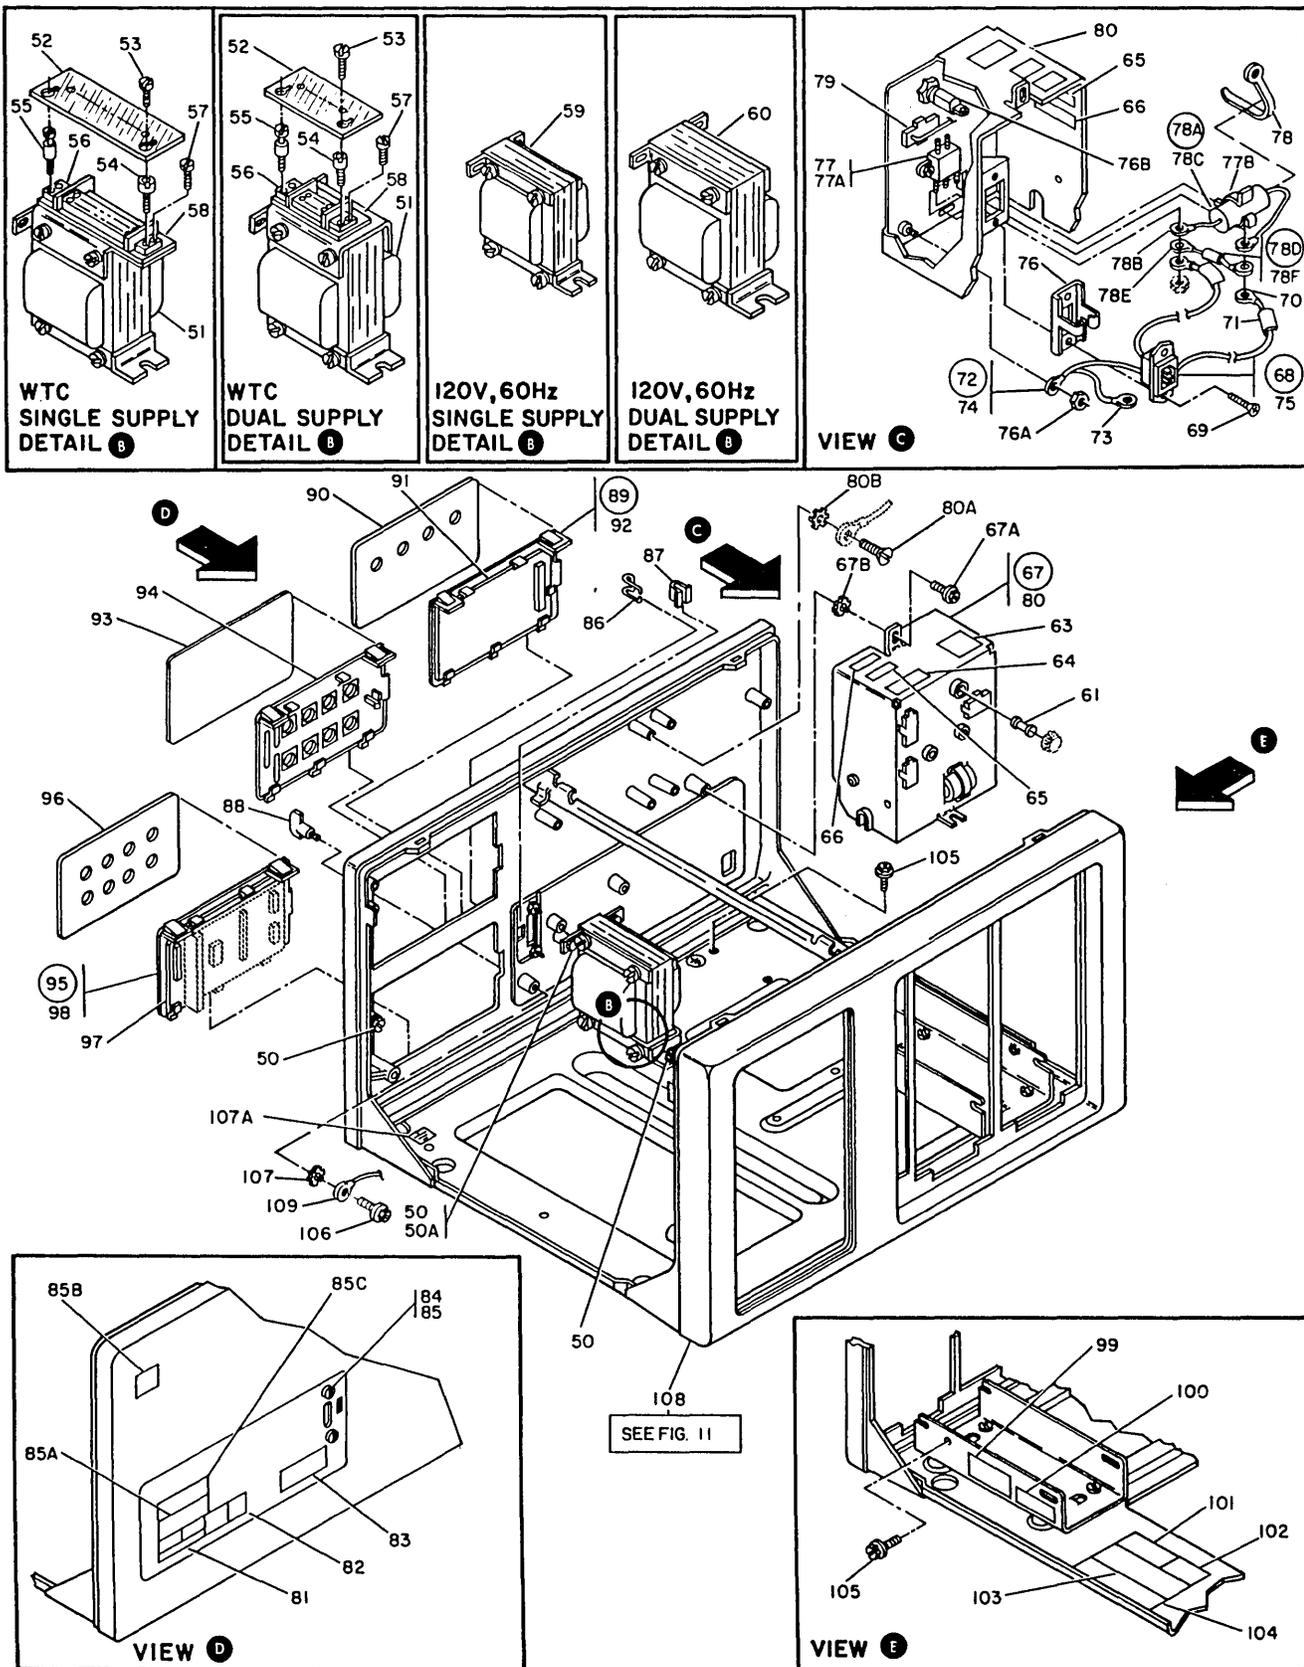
FINAL ASSEMBLY 3274 (SHEET 2 OF 2, INDEX NOS. 50-109)
